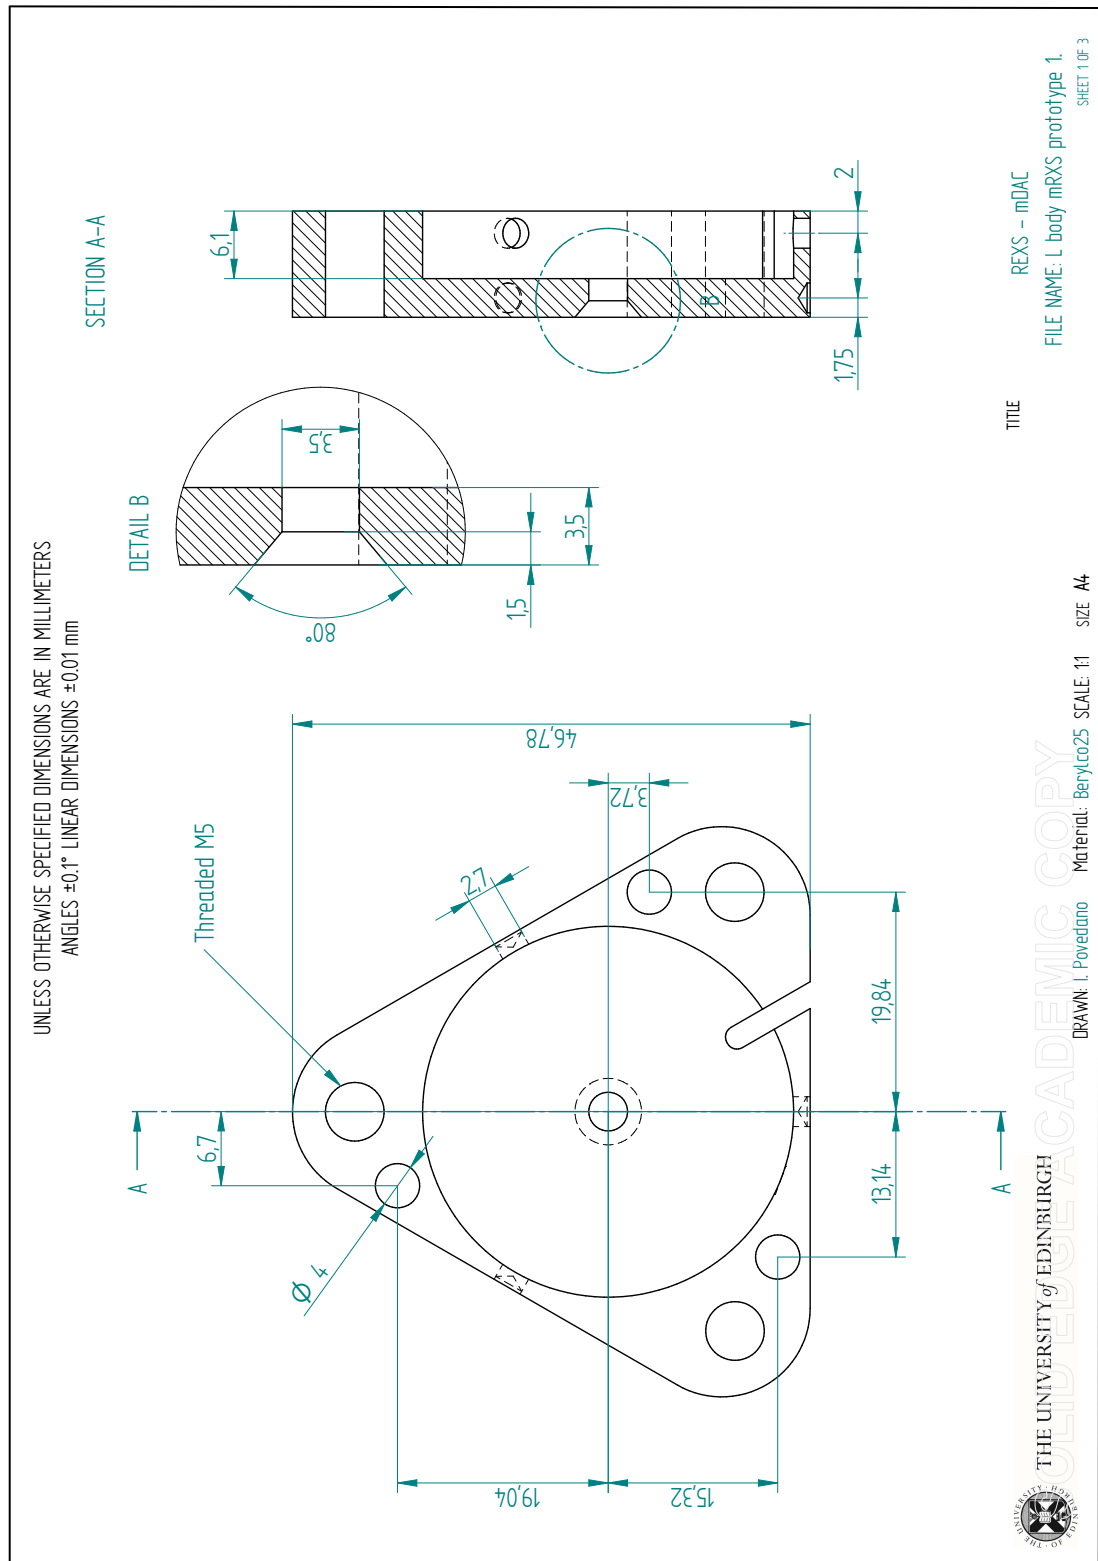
Lower body mRXS prototype 1. Sheet 1 of 3.
